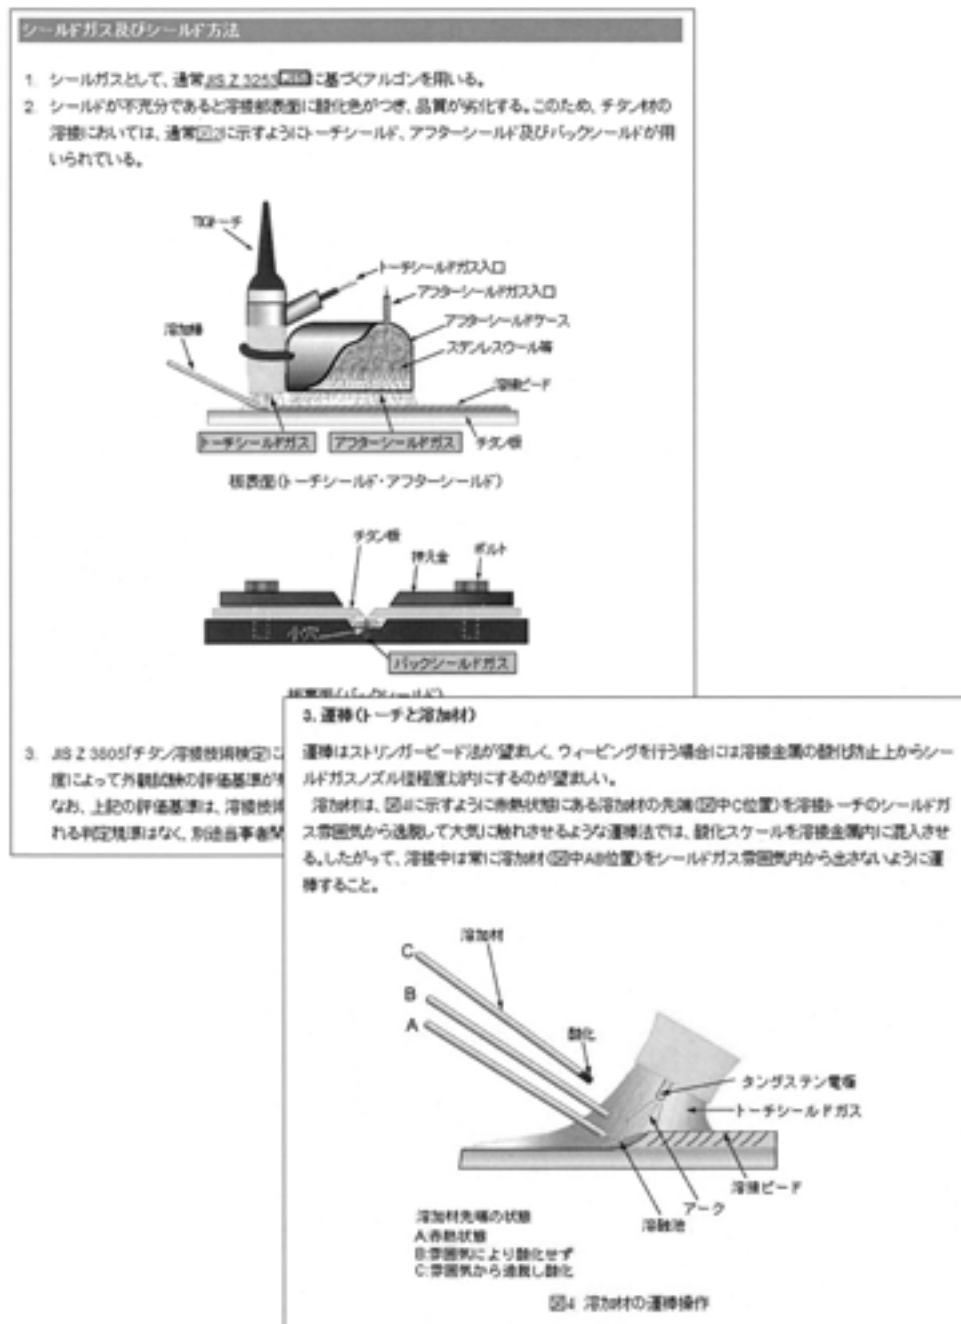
Explanation of Gas shielding process and weaving motion at TIG welding.
